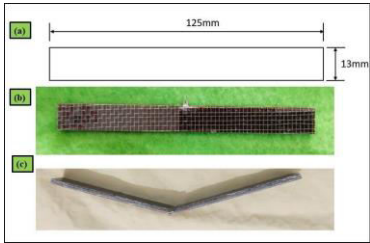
(a) Standard size flexural specimen, (b) Specimen for flexural WBJBJW composite, and (c) Specimen for flexural fractured WBJBJW composite
